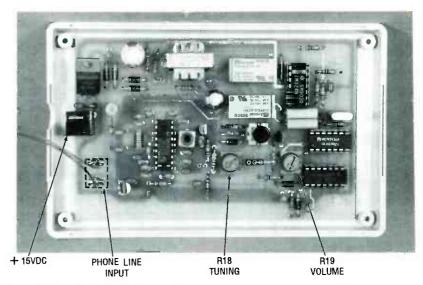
THE AUTHOR'S PROTOTYPE. Do not use an IC socket for IC4, and be careful when soldering it as excessive heat can damage the chip.
